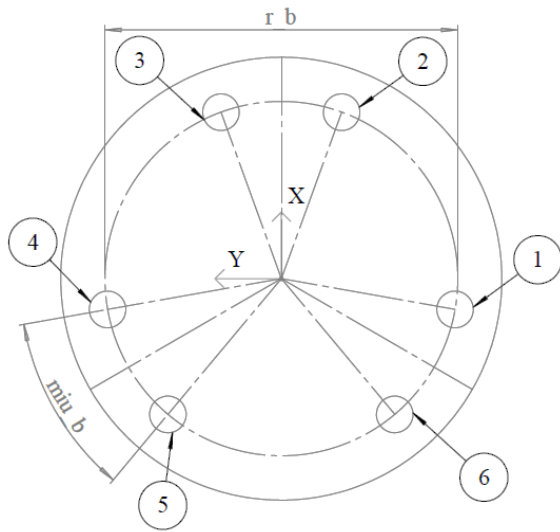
Illustration of actuator lower part attachment position on base with r_b = base radius and μ_b = pair of actuator lower part attachment spacing.
